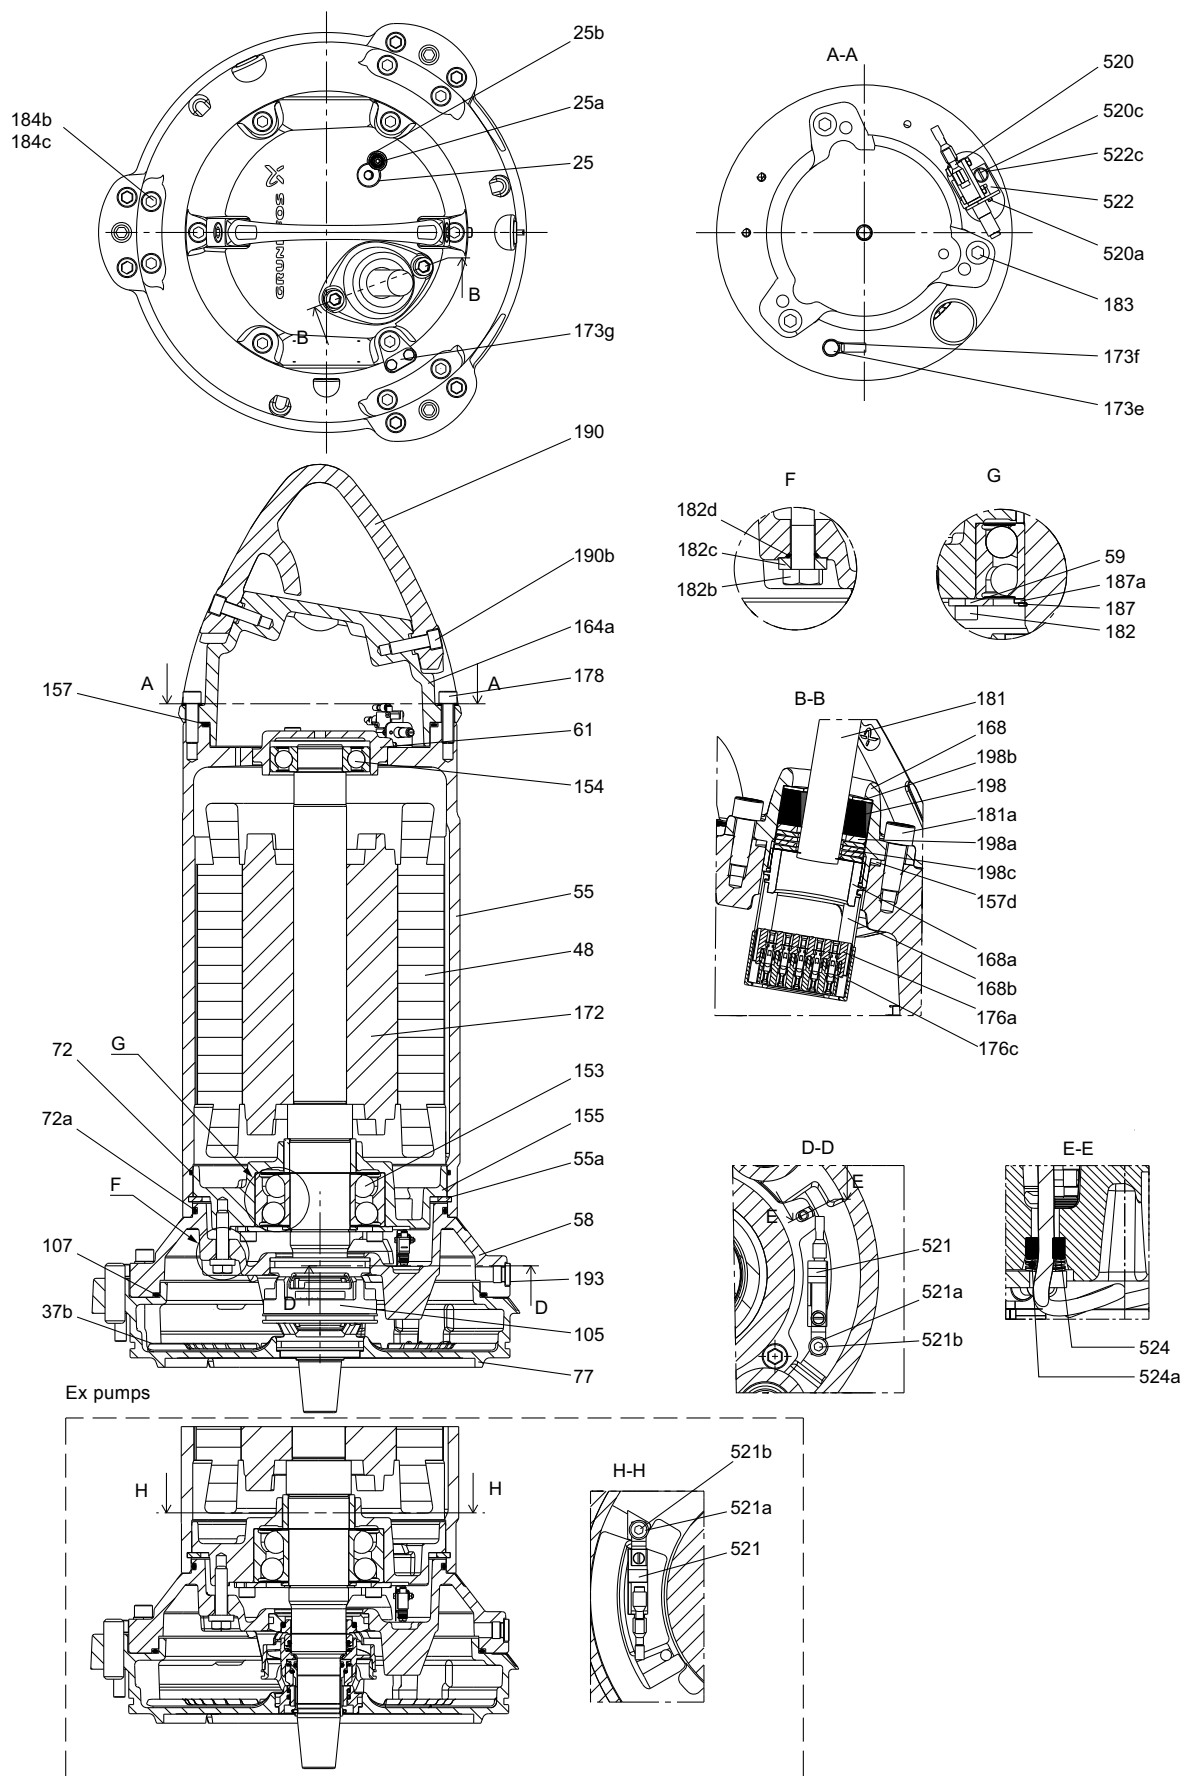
SL pump, without cooling jacket (6-pole motors)
